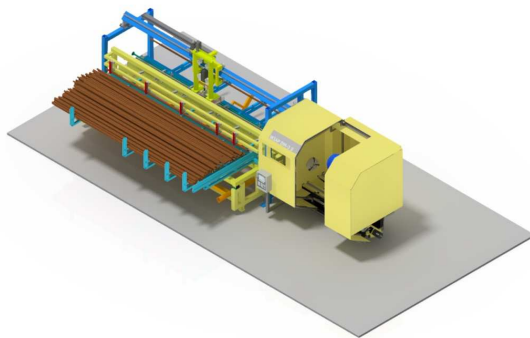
Fully automatic CNC multi-function machine tool WIAP DM3S for unmanned machining steel reinforcing bars (design and manufacture: WIAP AG)
